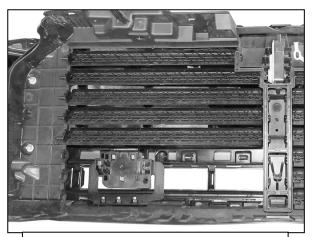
Line up Bracket on flat area between arrows and with sensor pointed straight forward. Mark location of slots onto grille. Use 5/16" drill bit to drill the mounting holes
